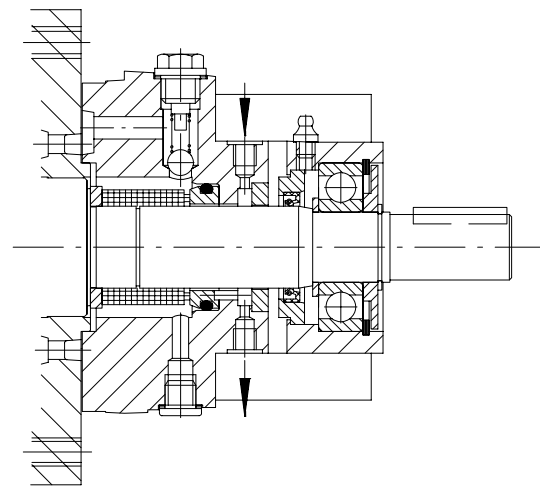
SN..ER..E QT, external bearing, capable of relubrication, mechanical seal, quench (throttle bush)
